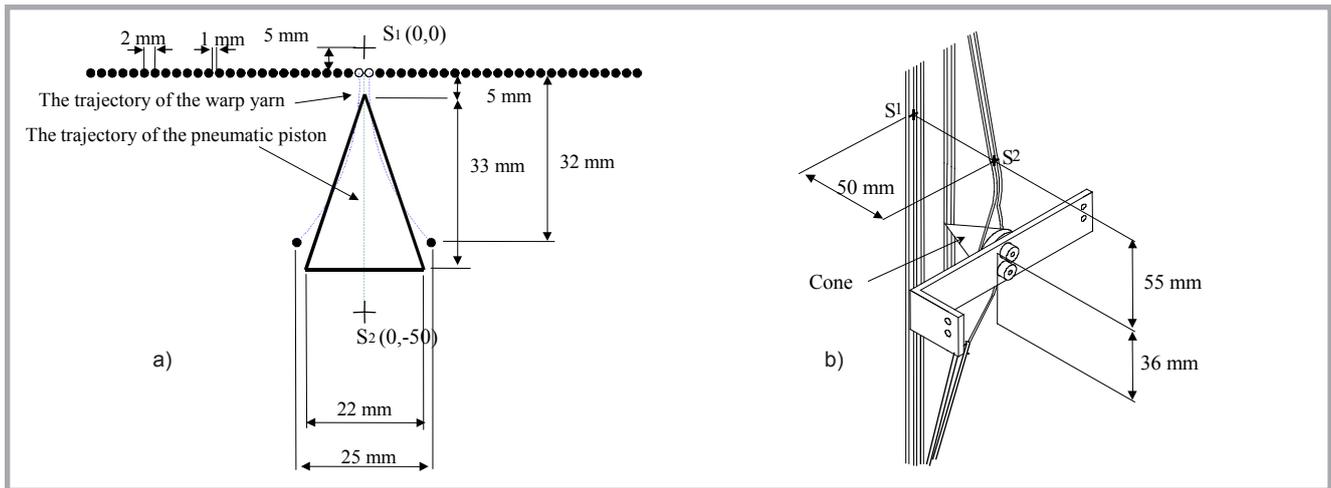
Schematic drawings of the warp control mechanism; a) Top view, b) Isometric view.
